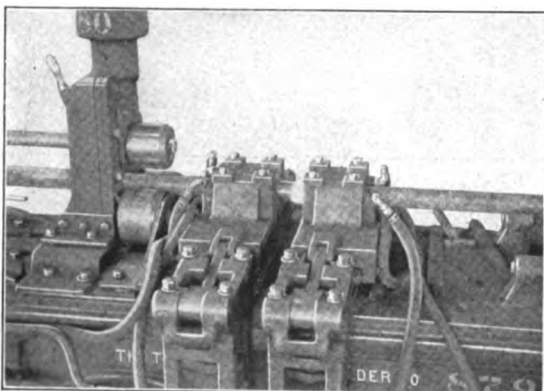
ALMOST HOT ENOUGH FOR WELDING
